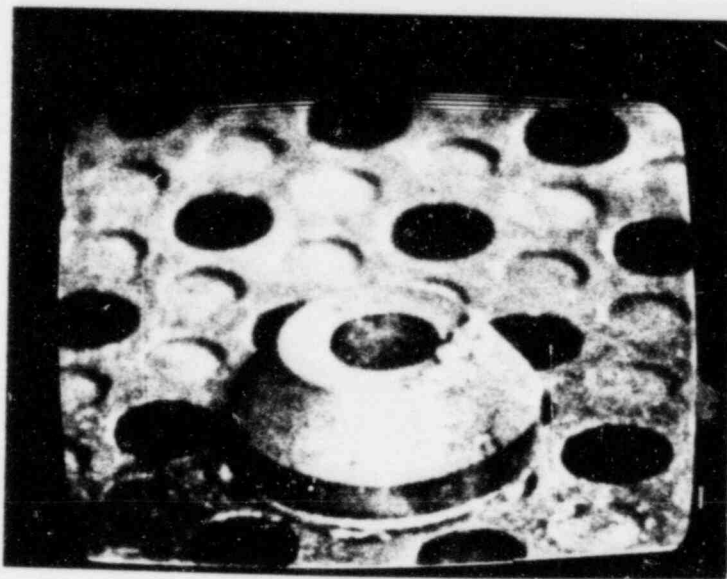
Top surface of element 2-2815 (located directly below element 2-1707) showing (a) B dowel pin free of debris and (b) both E dowel pins showing debris from the dowel sockets of element 2-1707
